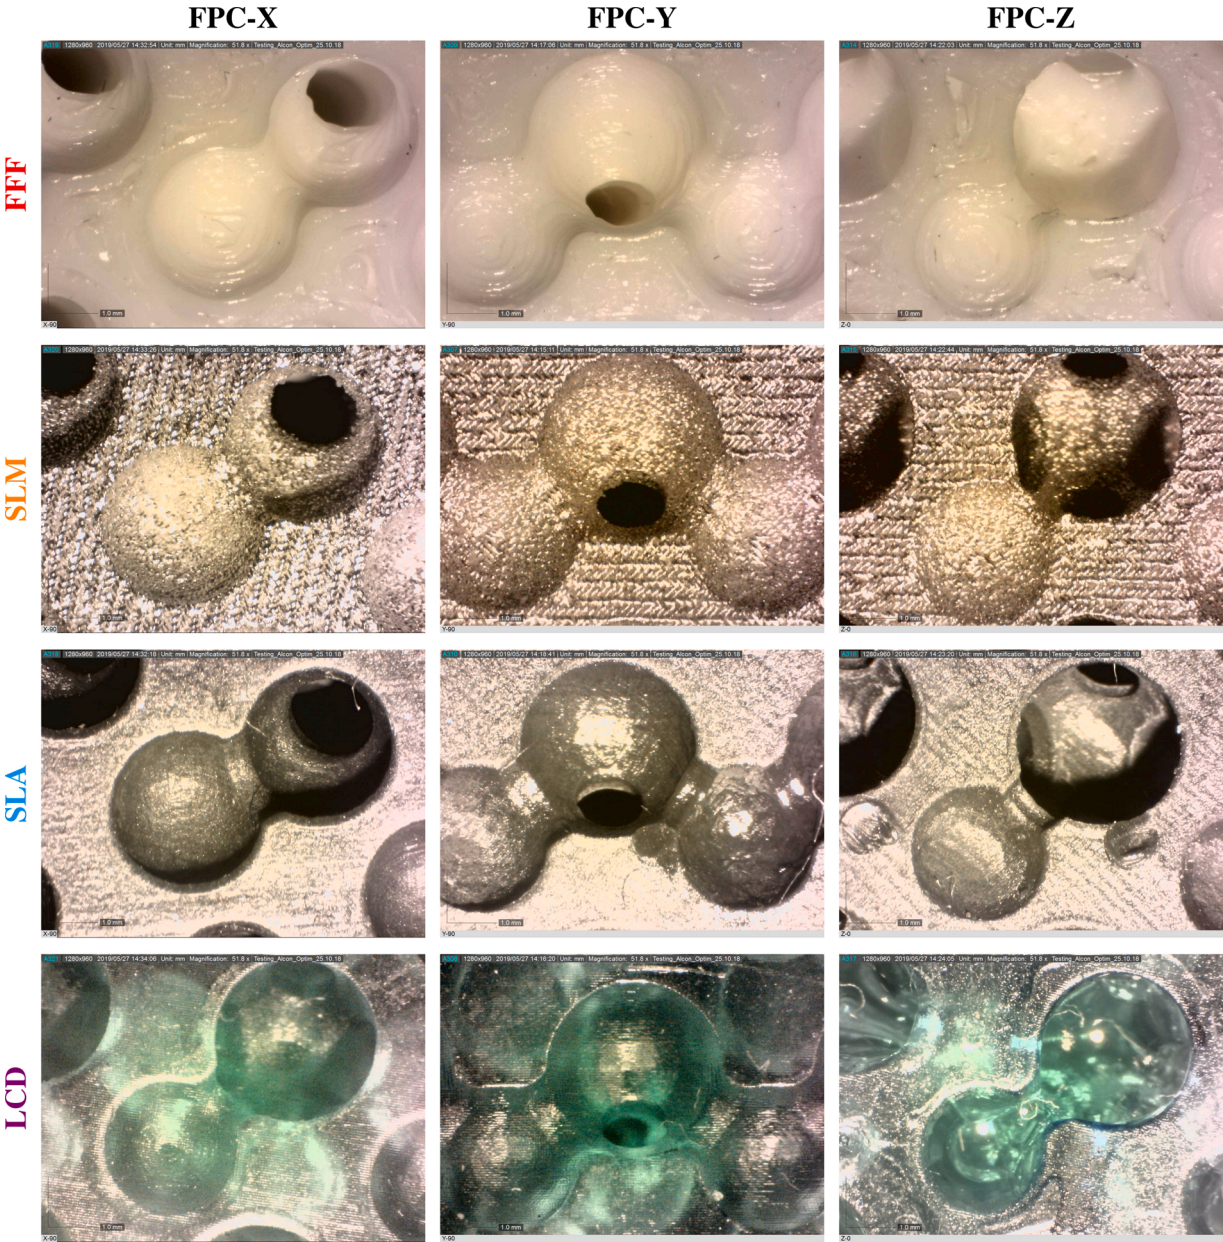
Zoomed surfaces of FPC samples manufactured by TCD.
